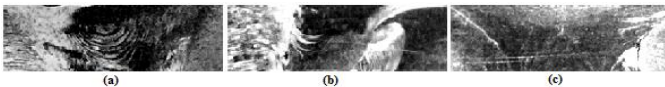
Macro image of transverse cross section at 20X (a) TCT tool with 900 rpm & 100 mm/min (b) TST tool with 900 rpm & 90 mm/min (c) SS tool with 900 rpm & 110 mm/min
